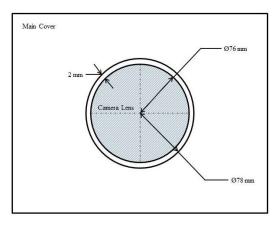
Dimension of Hole on Main Cover for Camera Lens
